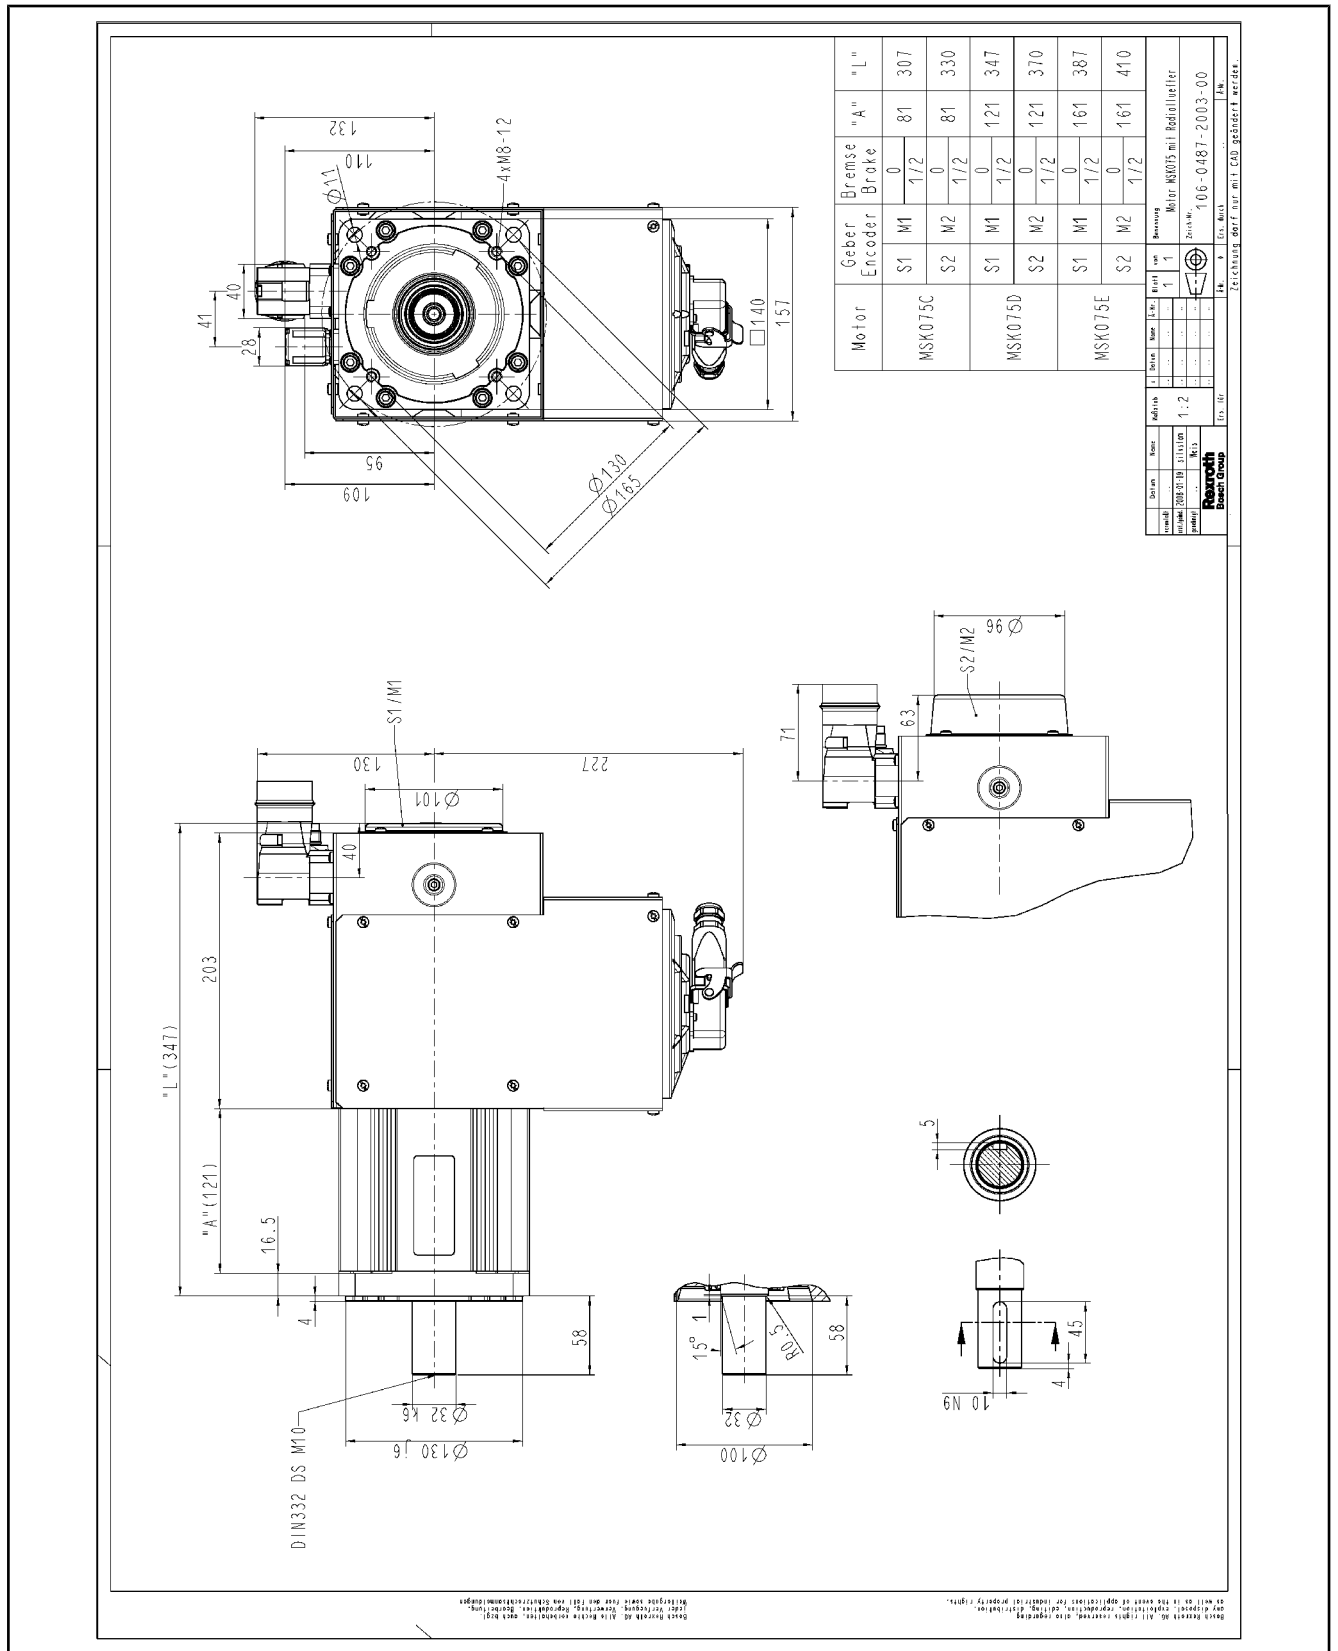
Dimension sheet MSK075 with radial fan unit
